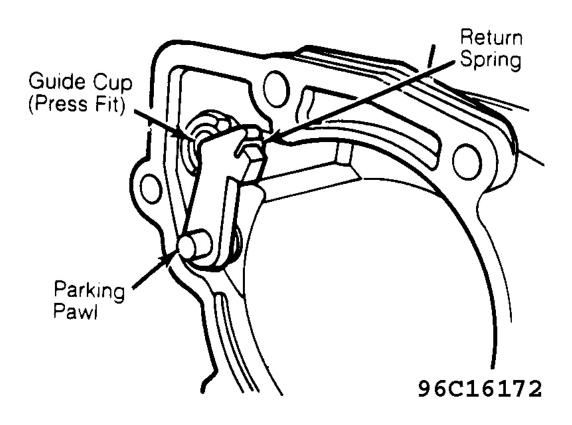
Interior View of Extension Housing Courtesy of FORD MOTOR CO.
